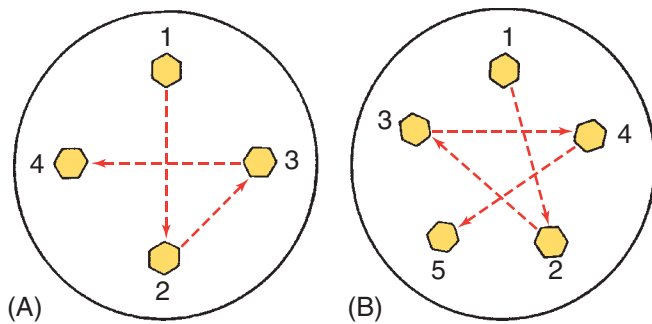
The lug nut tightening sequence for (A) a four-lug wheel and (B) a five-lug wheel.
